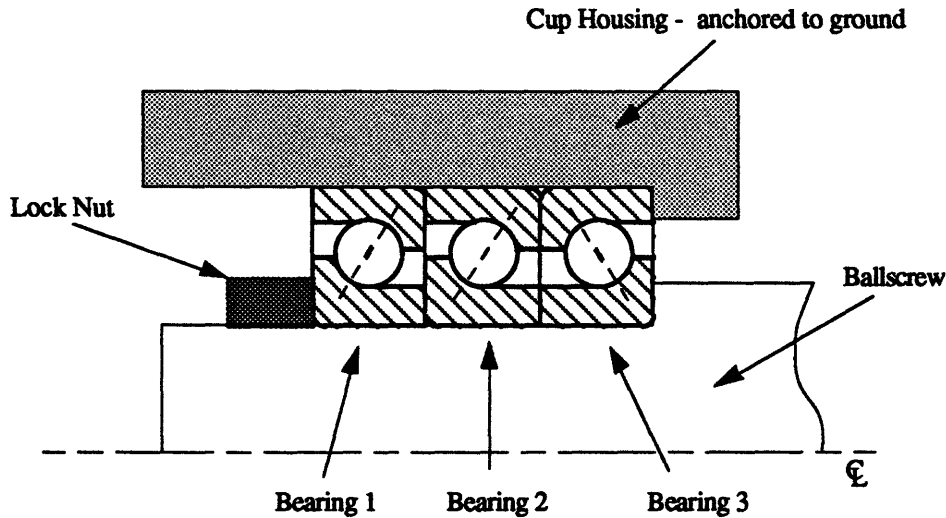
Triplex Angular Contact Ball Bearing System.
